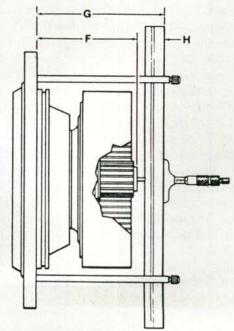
View of special tools used to determine dimension (F) from flange of hub to end of sun gear shaft. Refer to text for procedure.
